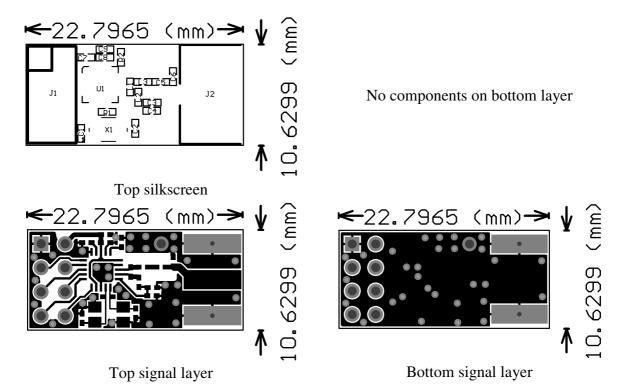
nRF24L01+ REFMOD with SMA connector PCB layout
